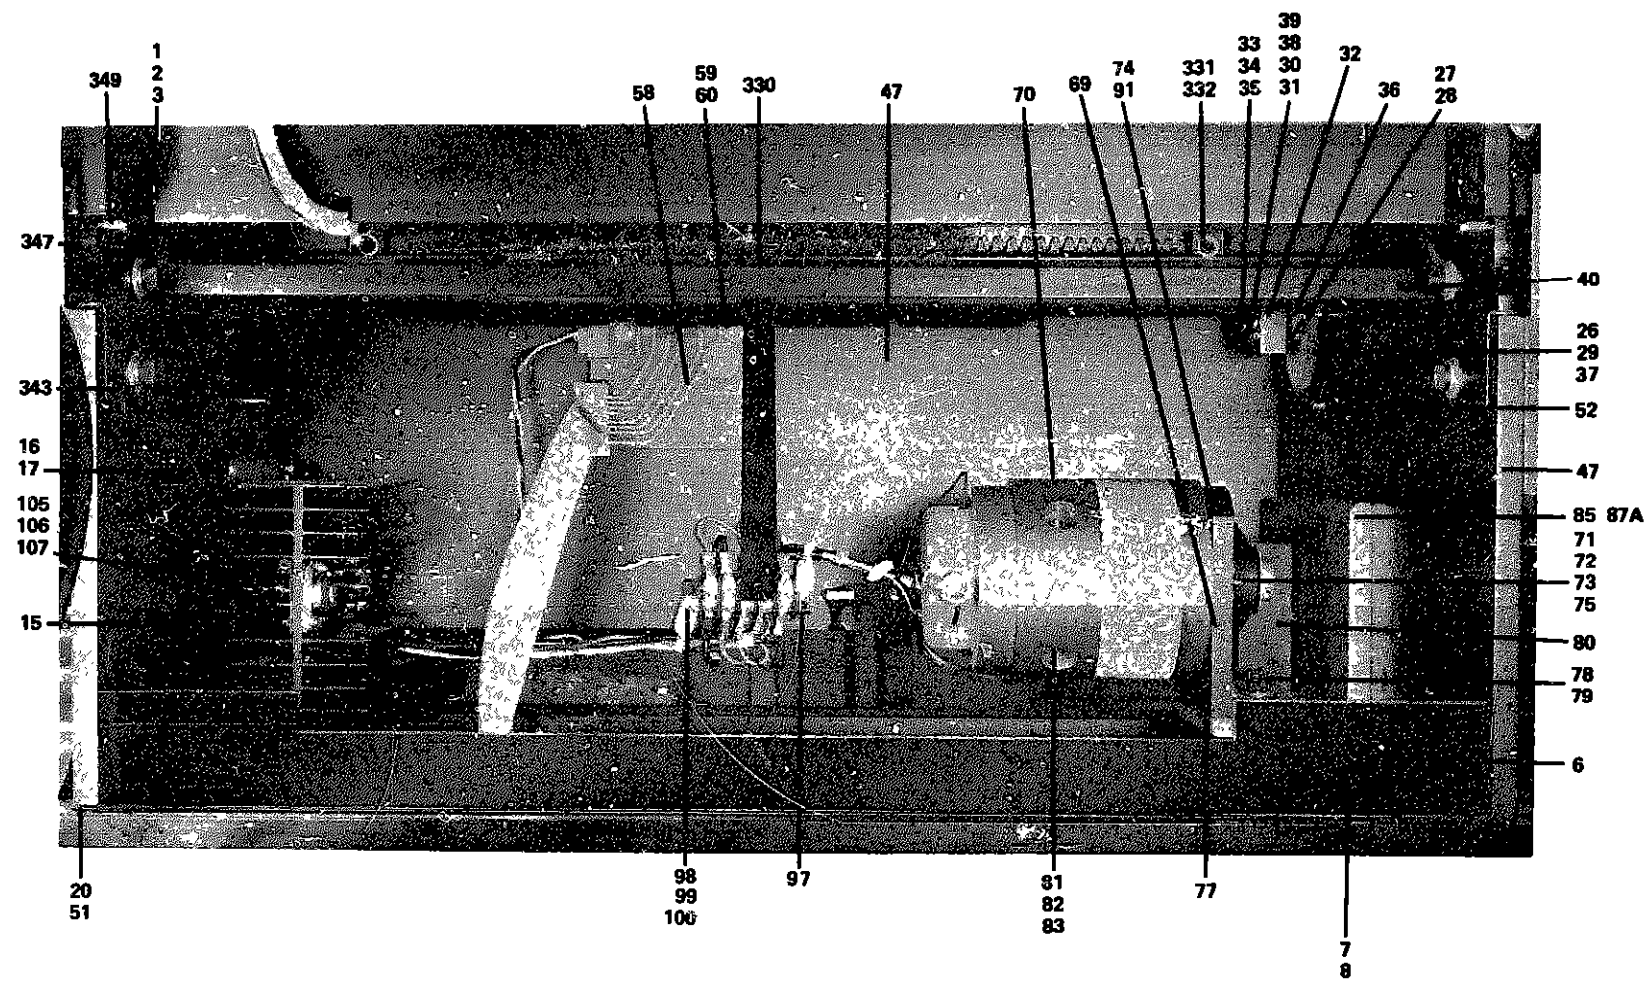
Paper Drive Assembly Vertical Servo 1A7A1 (Sheet 3 of 8)
